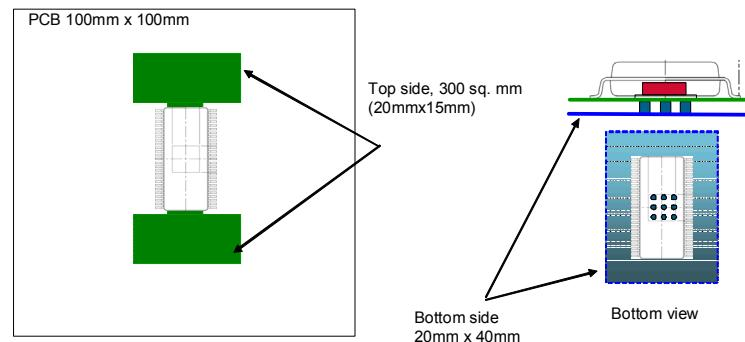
PCB with Top and Bottom Layer Dissipation Area (Dual Layer)
